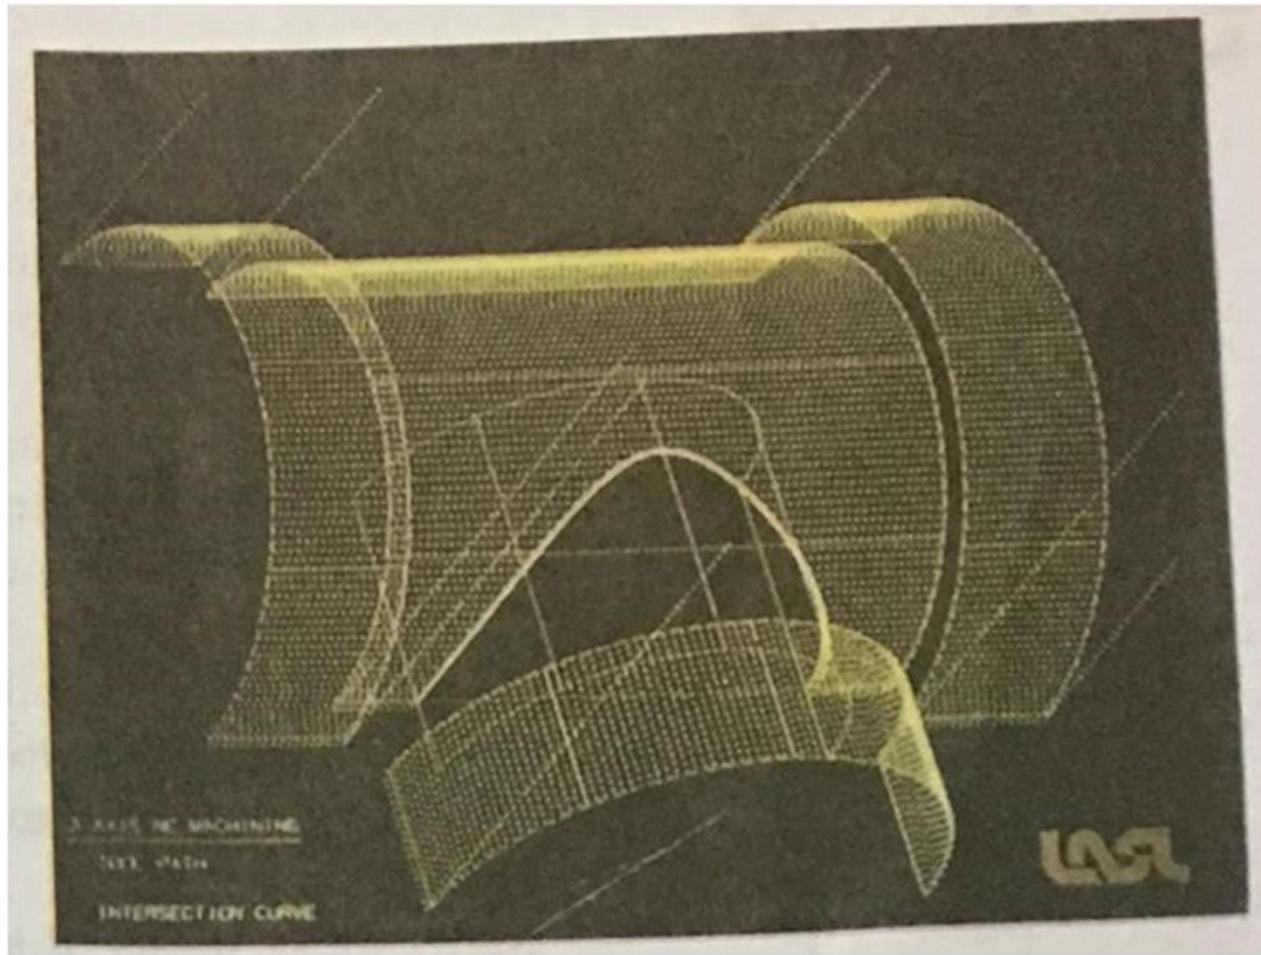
A CAD layout for describing numerically controlled machining of a part
